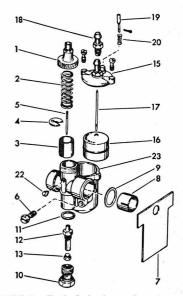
Exploded view of carburetor typical of type used on models 125, 165, Ranger, Pacer and Scat.
